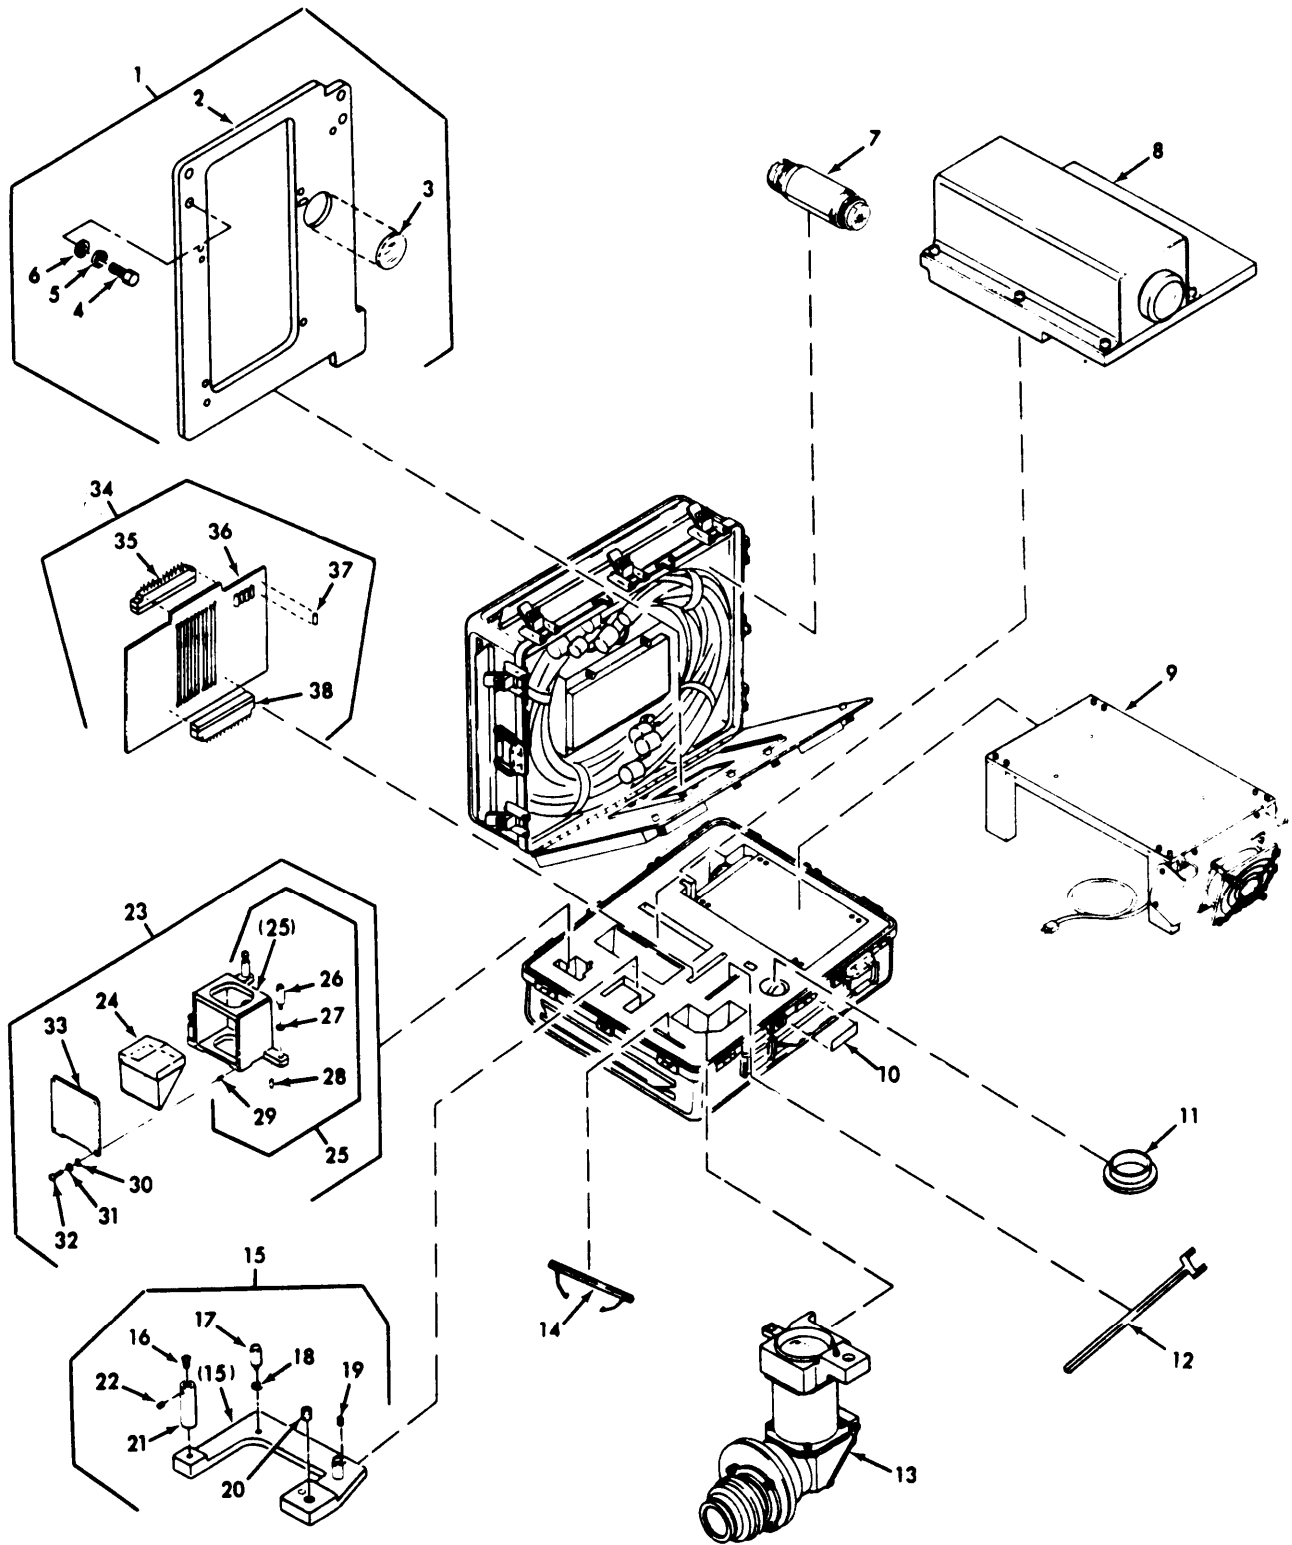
ACCESSORY STORAGE ASSEMBLY COMPONENT
